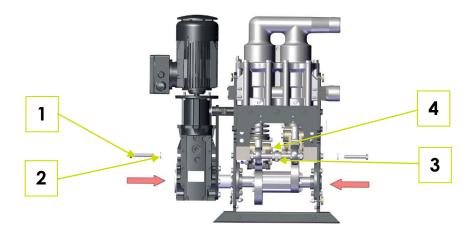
Mounting the shear axles, inserting the pump unit
